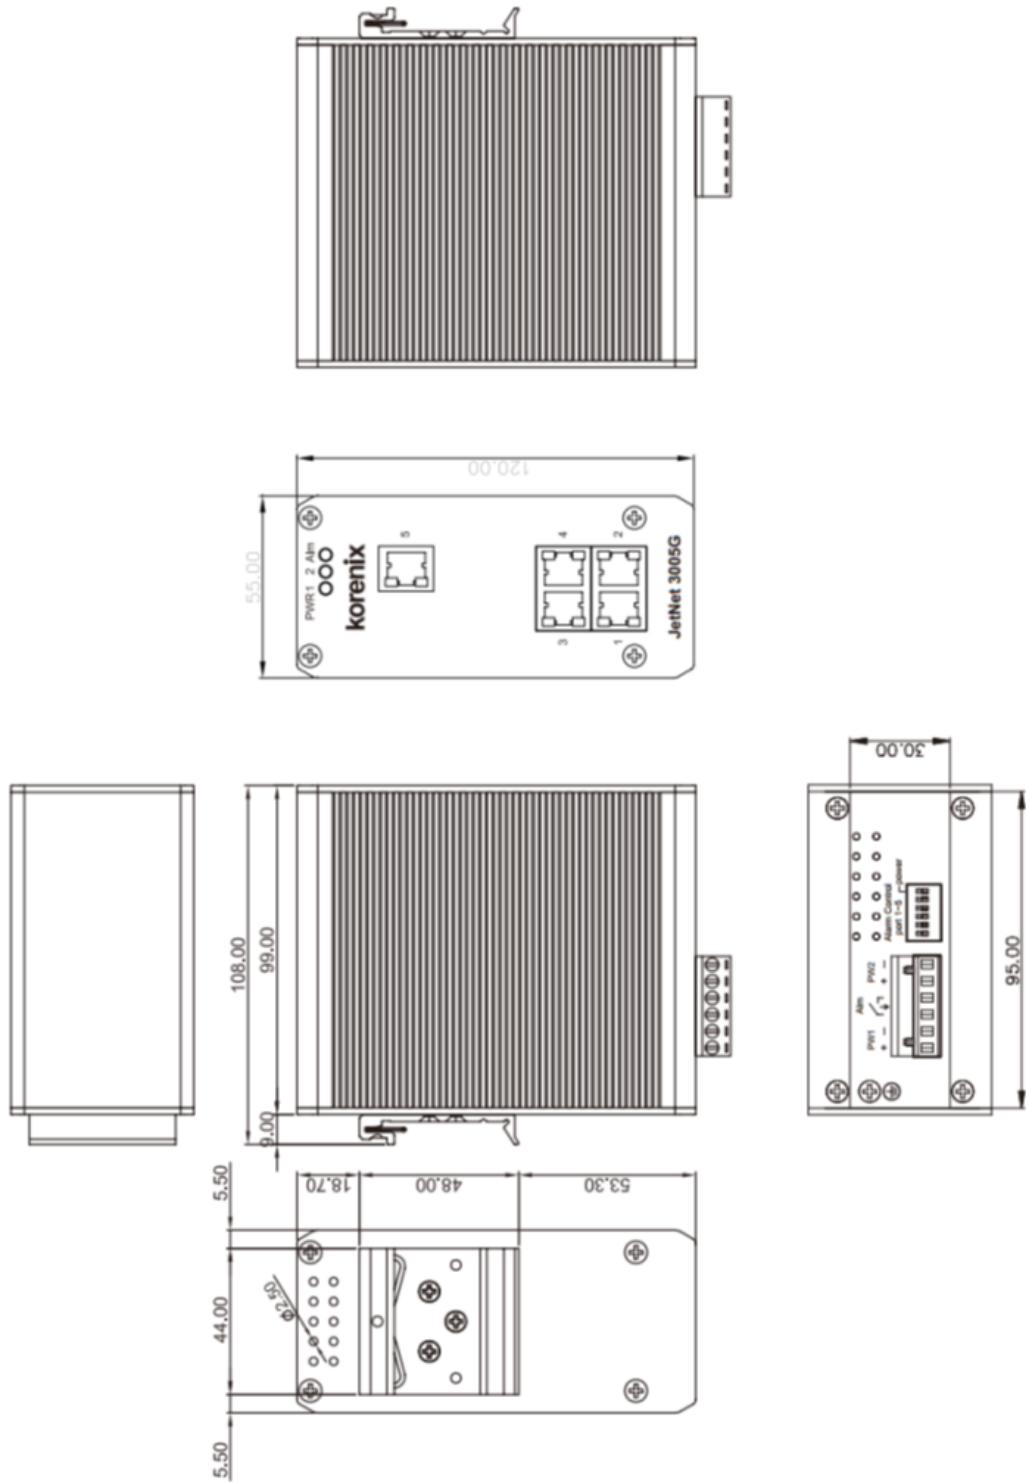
Ethernet Switch (Option 2): Korenix JetNet 3005G technical drawing (in inches)
